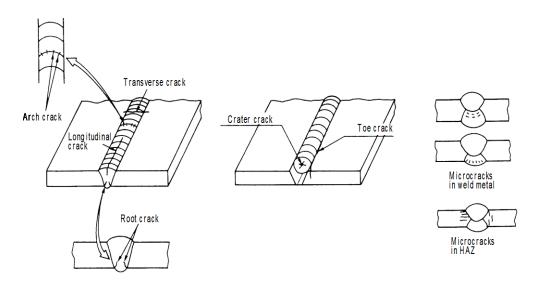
Designations of cracks in aluminum and its alloy welds [Ref. 1]
